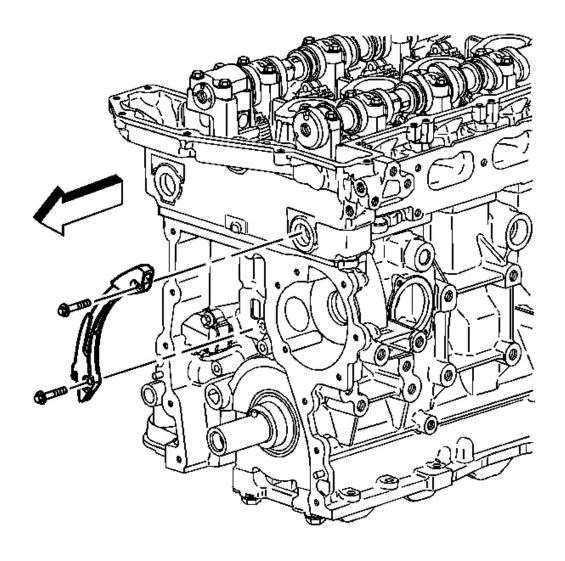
View Of Timing Chain Guide & Bolts Courtesy of GENERAL MOTORS CORP.
